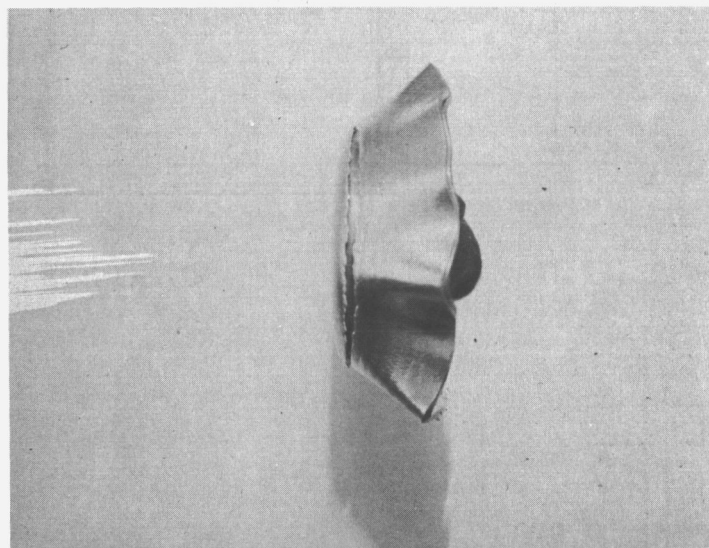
Side View of the Magneform Assembly Shown in Figure 39.
